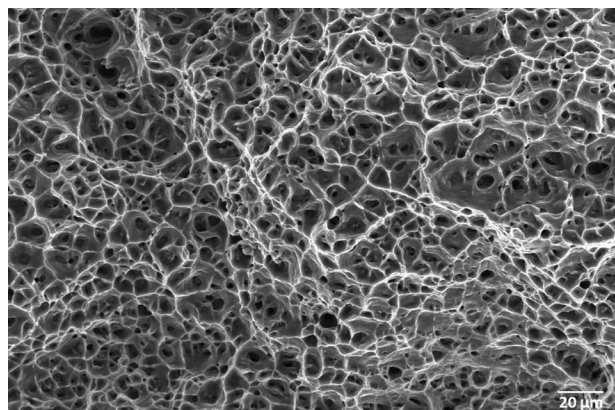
High magnified image of the fracture surface shown in Fig. 158 indicating ductile fracture
